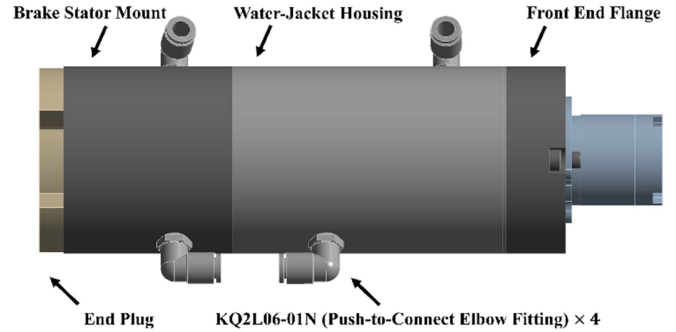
TurBO motor water-jacket housing assembly with coolant-port fittings.
